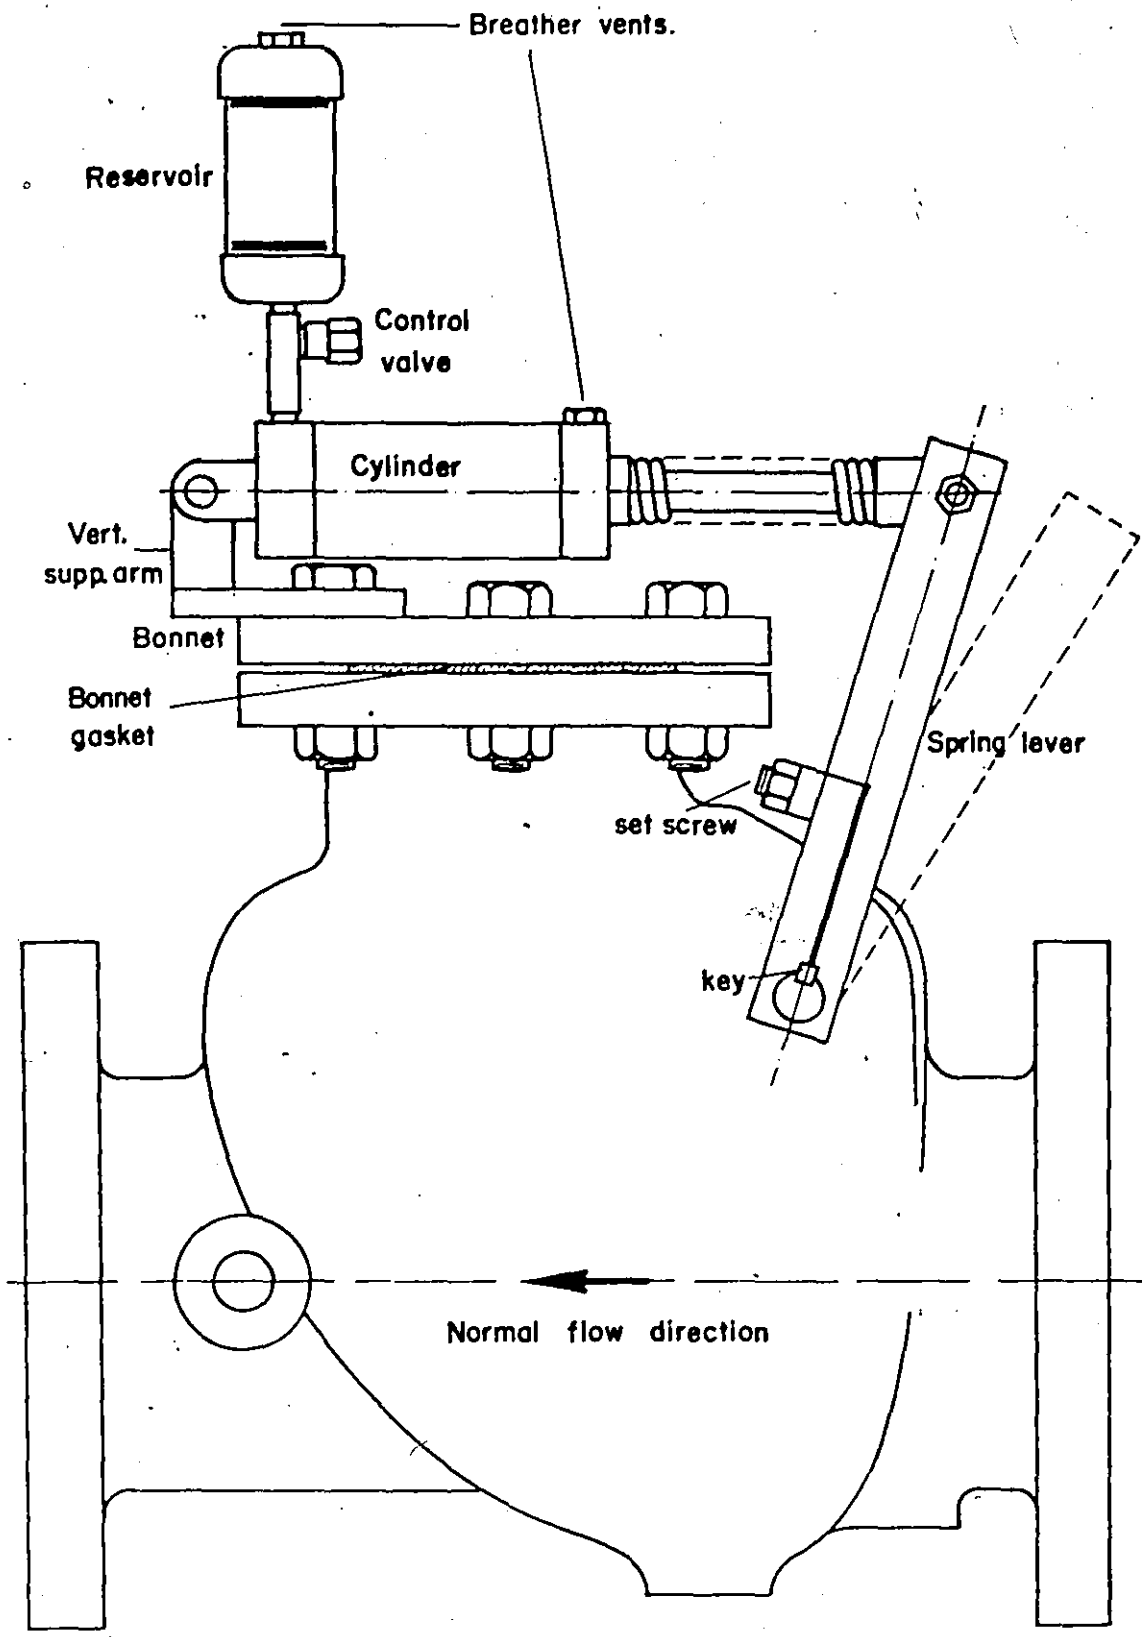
Check Valve with Hydraulic Oil Cylinder Arrangement.
